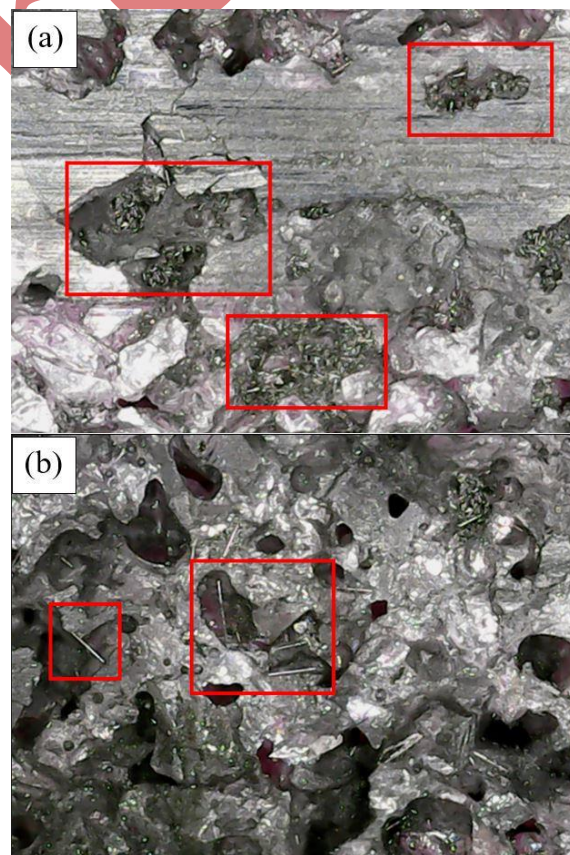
Tools surface topography with 450x magnification, (a) before milling, (b) after milling.
